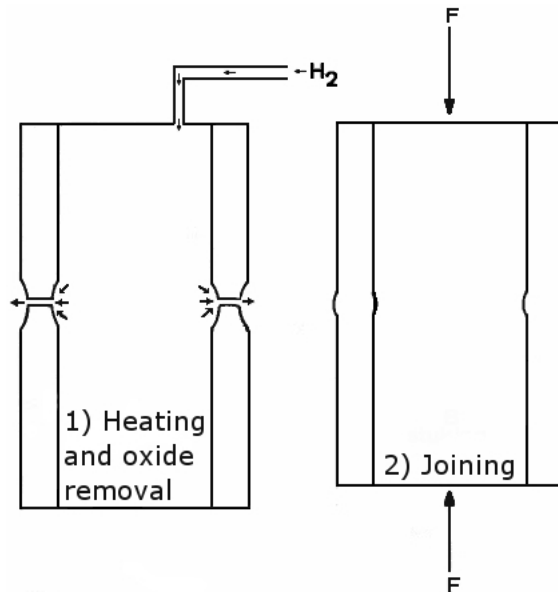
Schematic sketch of the general forge welding process. Modified from Moe [33].
